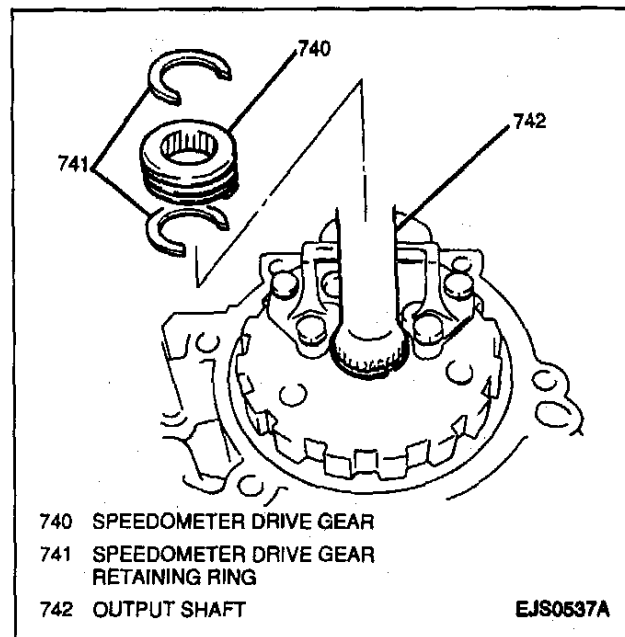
Speedometer Drive Gear Removal (3L30, 3-Speed)
